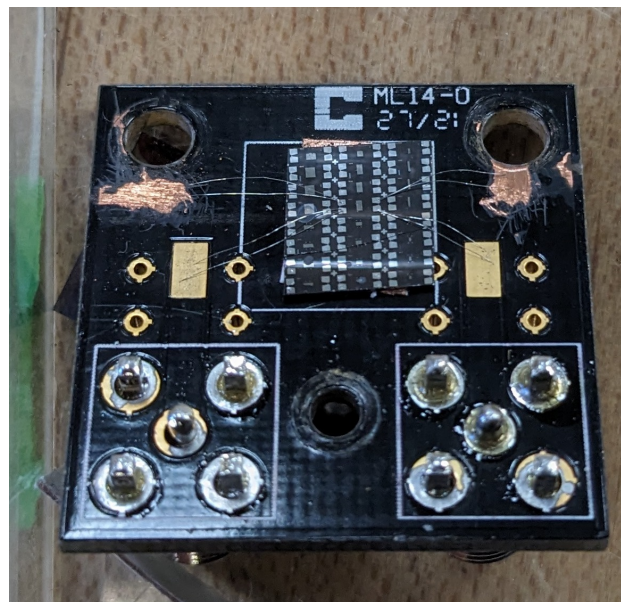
Soldered and wirebonded PCB; later used for characterization in Chapter 4.
